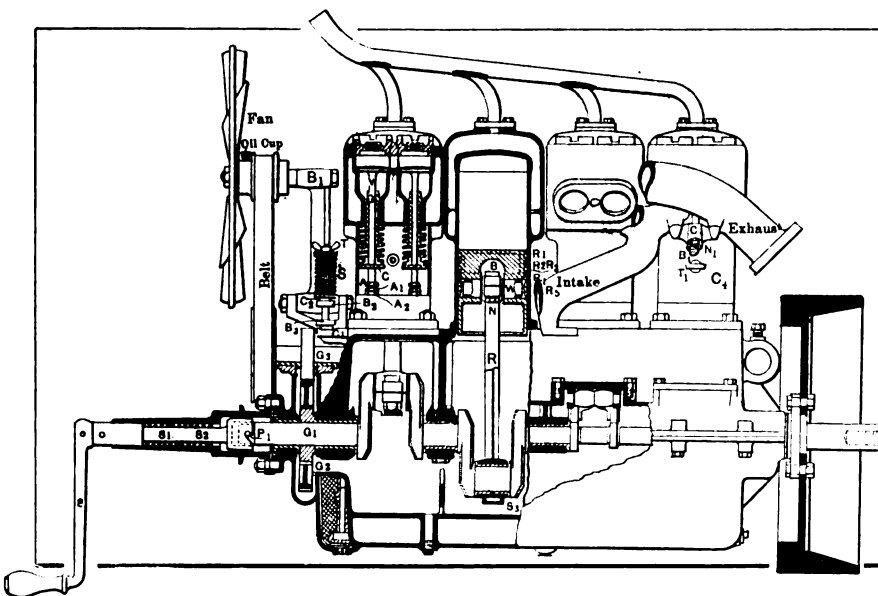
Longitudinal section of Rutenber motor, illustrating details of working parts
